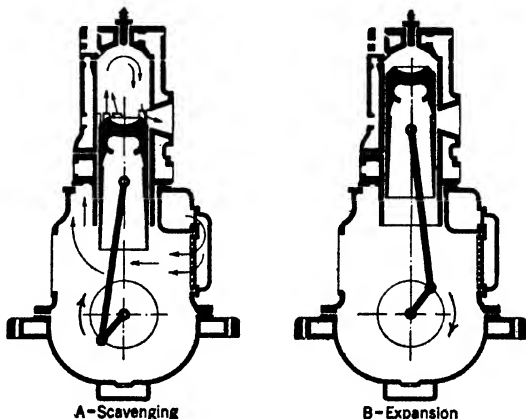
Cylinder events of a two-stroke cycle solid-injection Diesel engine.
